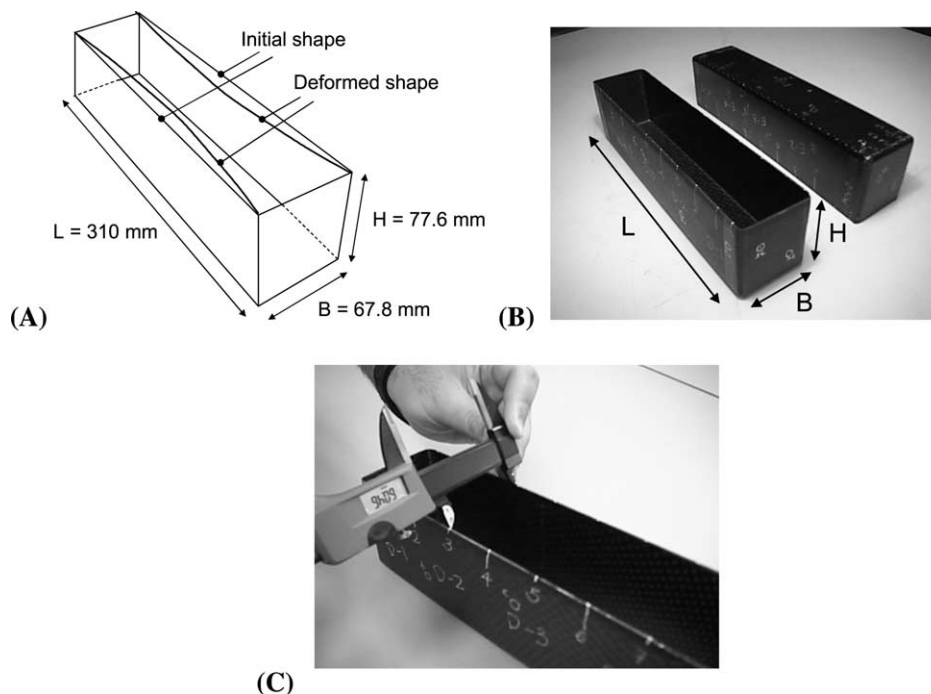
(A) Schematic top view of the T-45 rib showing initial and deformed shape; (B) top and bottom view of manufactured rib; (C) measurement of flange-to-flange distance (spring-in) on intact rib.
